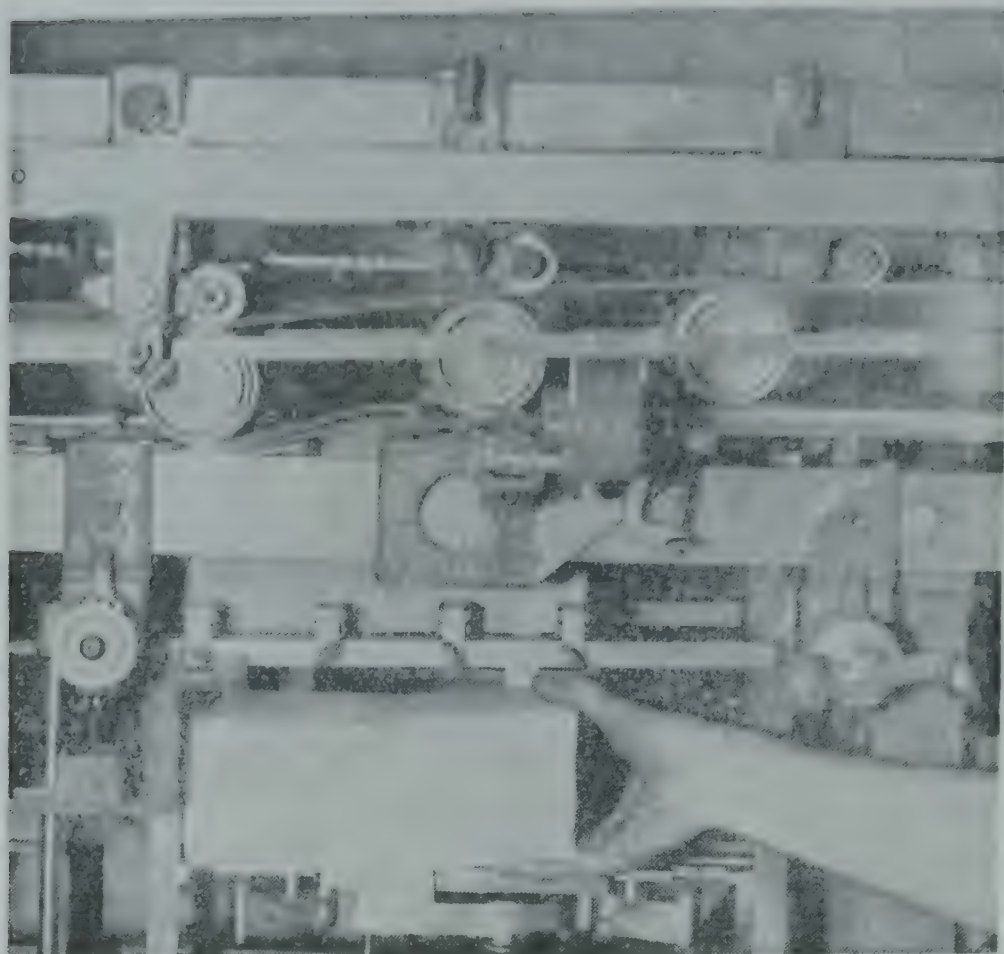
Close-up of can labeler in operation. (*Burt Machine Co., Baltimore.*)
